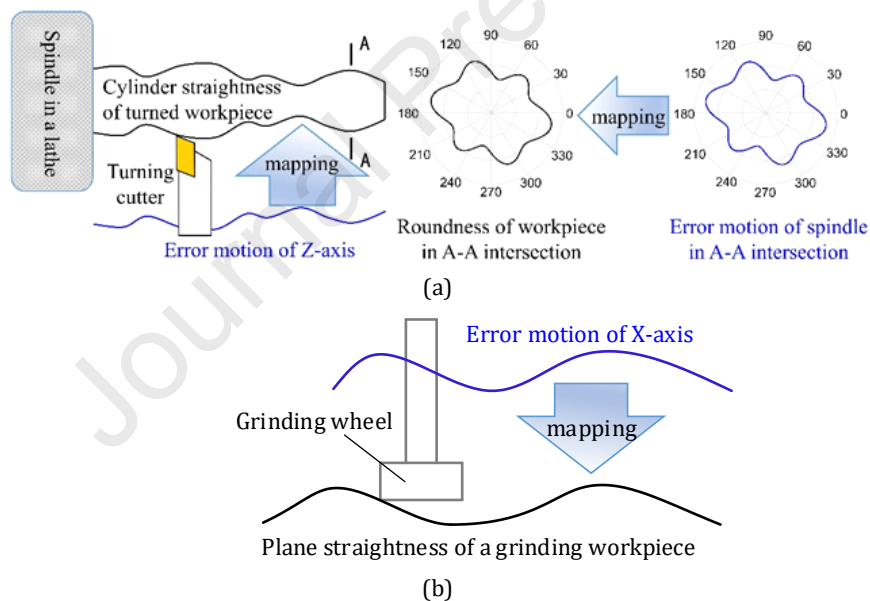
Error motion of tools, (a) in a turning process, the error motion of the Z-axis in the X direction determines the cylinder straightness of the machined parts and (b) in a grinding process, the straightness error motion of the linear axis will be mapped onto the manufactured surface.
